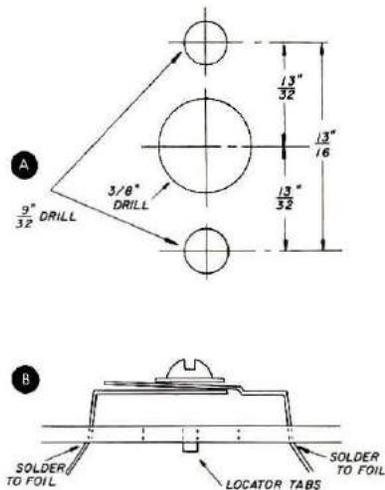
The Arco compression trimmers are difficult to mount and solder to the board unless you make the holes the right size and at the right spacing. This layout will help. Be careful with the large drills and the thin PC board material — be sure to have a wooden block to support the board, and don't force the drill through.
